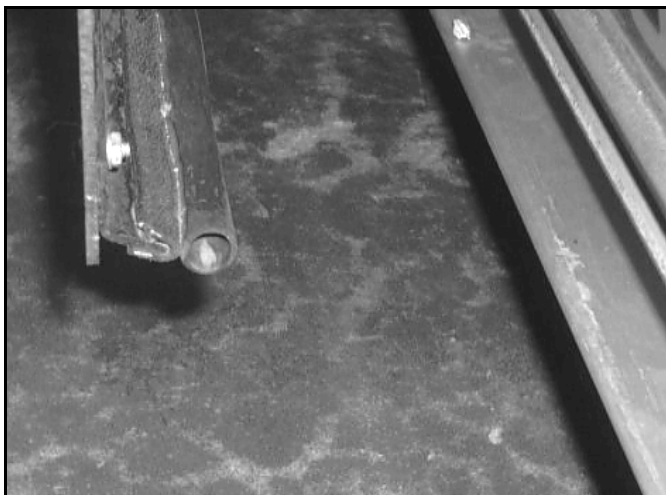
INSTALL DRIVER SIDE PANEL
